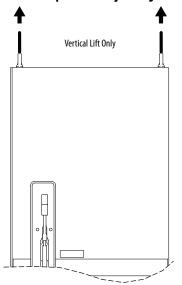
Frame 3 Complete Drive Pallet/Mounting Bracket Removal Instructions
